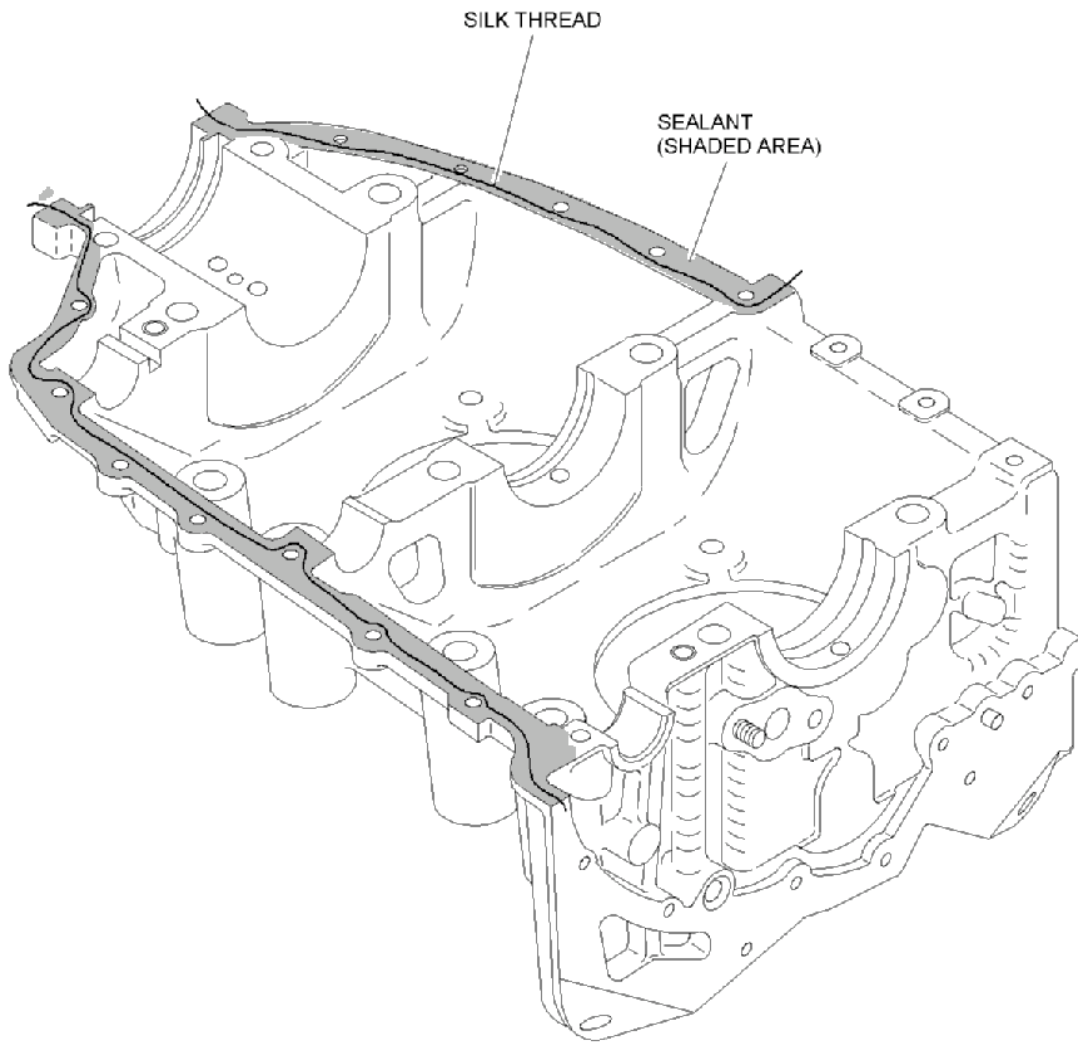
• Sealant Compound and Silk Thread Application
